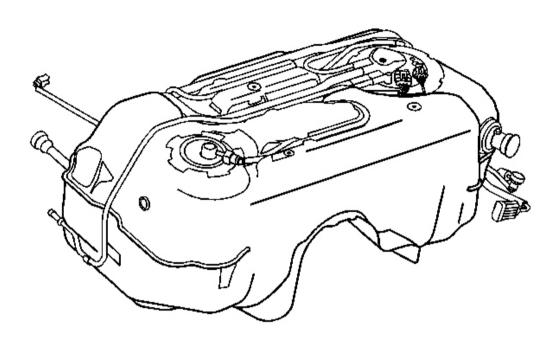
View Of Electrical Connectors From The Primary Fuel Pump Module Courtesy of GENERAL MOTORS CORP.
